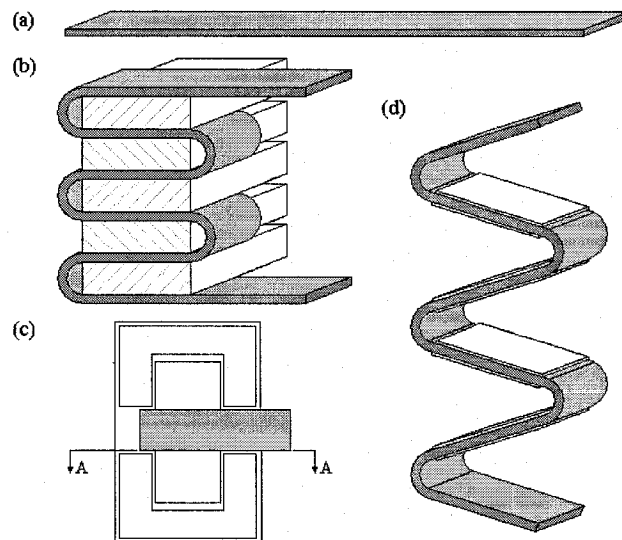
Fabrication process flow of the SMA actuator: (a) strip cut to length; (b) cross-section A-A view of forming process; (c) SMA actuator in heat treatment jig; (d) composite actuator
